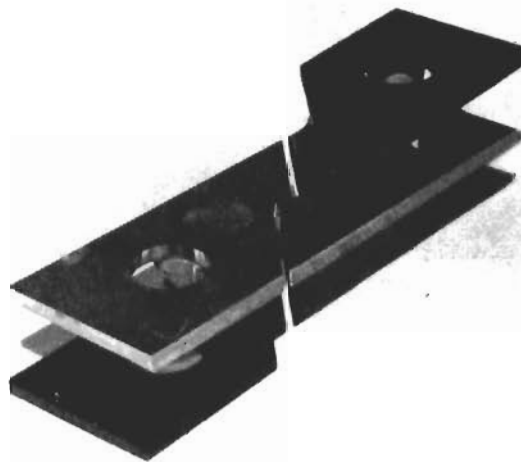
BUCKLED SHEAR SPECIMEN, 0.020 INCH THICK WITH TENSION-TEARING FROM TERMINAL HOLES
